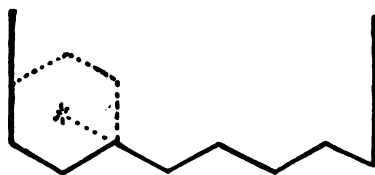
Showing how tool is used, dotted line indicating position of edge of tool. (After Goff)
